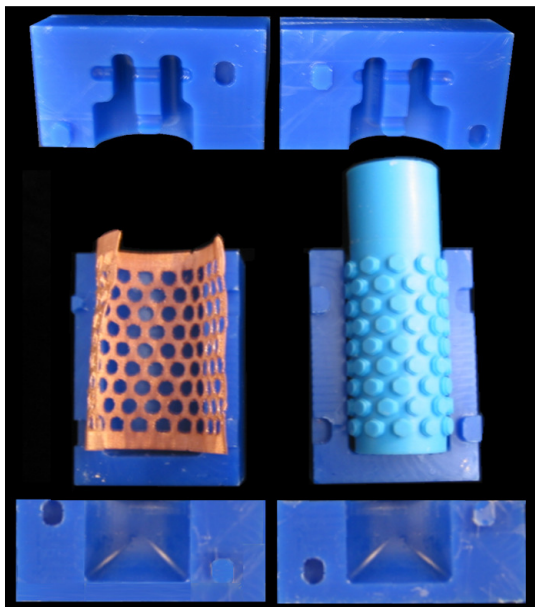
Wax and silicone rubber molds and copper mesh used in modified SDM fabrication process.
